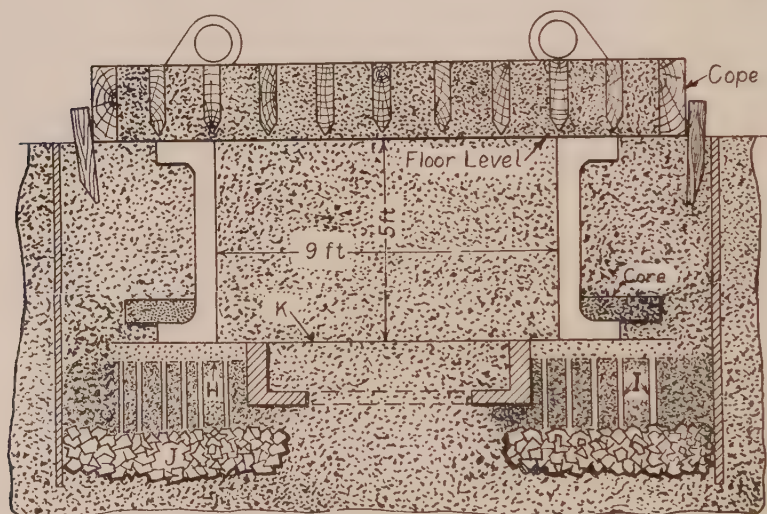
Casting a 9-ft. Pipe in Green Sand with Lower Flange on a Hard Bed.
